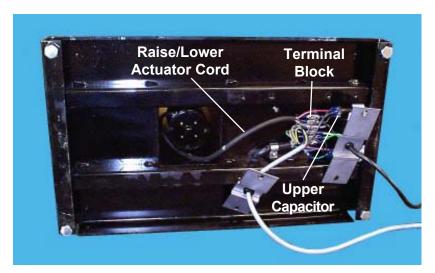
Raise/Lower Actuator Cord and Terminal Block
